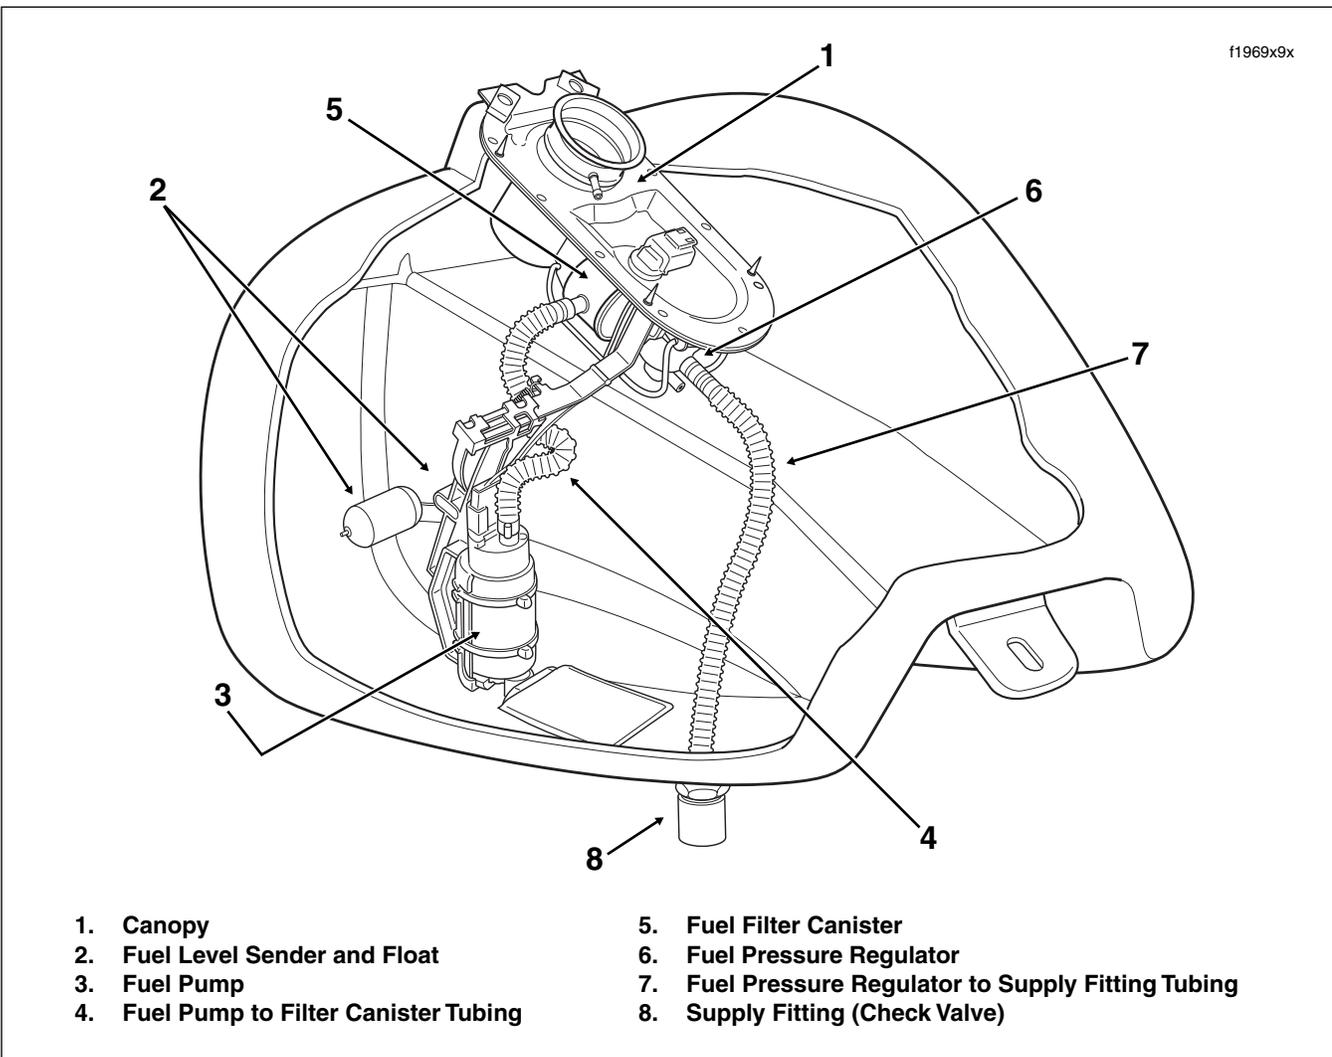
Fuel Tank Assembly (FLHXI, FLHT/C/U/I, FLTRI)
